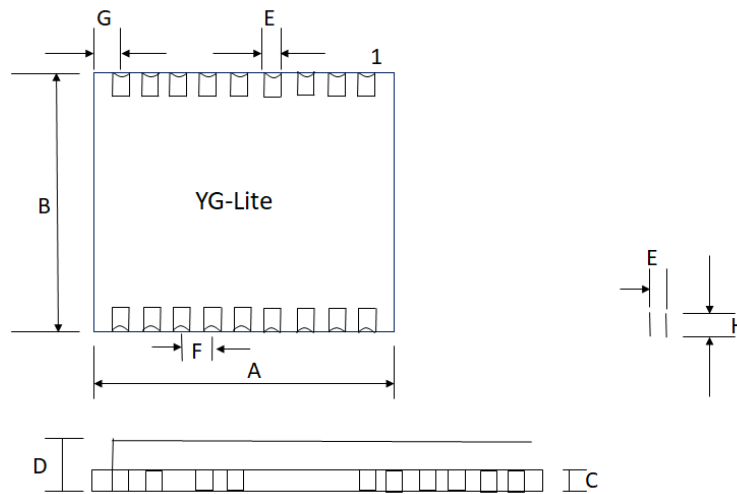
Module Package Dimensions (All dimensions in mm)
